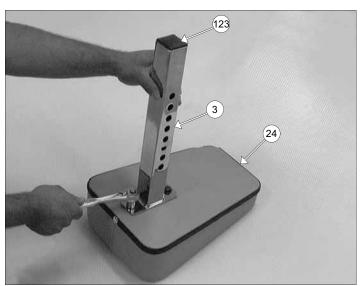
Using a rubber mallet, insert one Plastic Insert Cap 1 3/4" Sq. (#123) into the tube-end of the Back Pad Adjustable Tube (#3). Next, attach the Back Pad Adjustable Tube (#3) to the Leg Extension Back Pad (#29) using two Hex Head Cap Screws 3/8-16 X 1 1/4 (#96), and two Flat Washers SAE 3/8" (#93).
